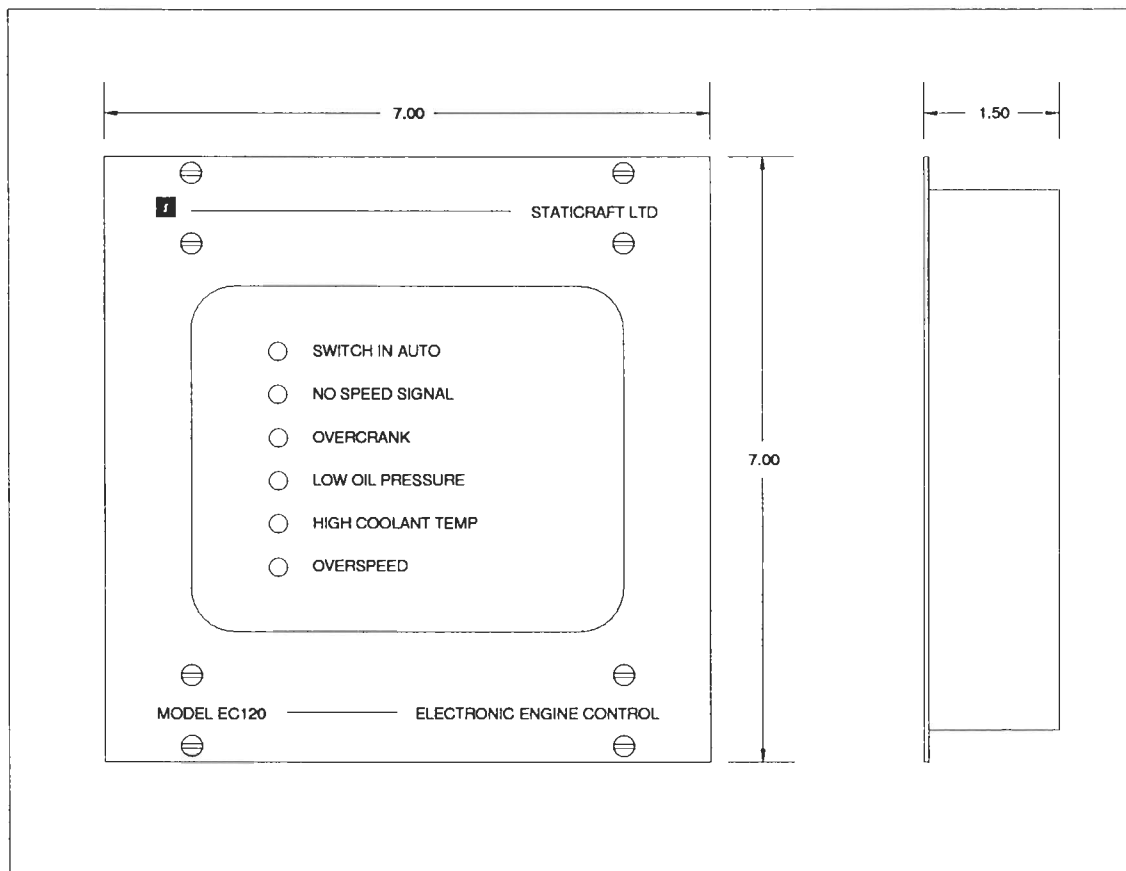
EC120 PHYSICAL LAYOUT
